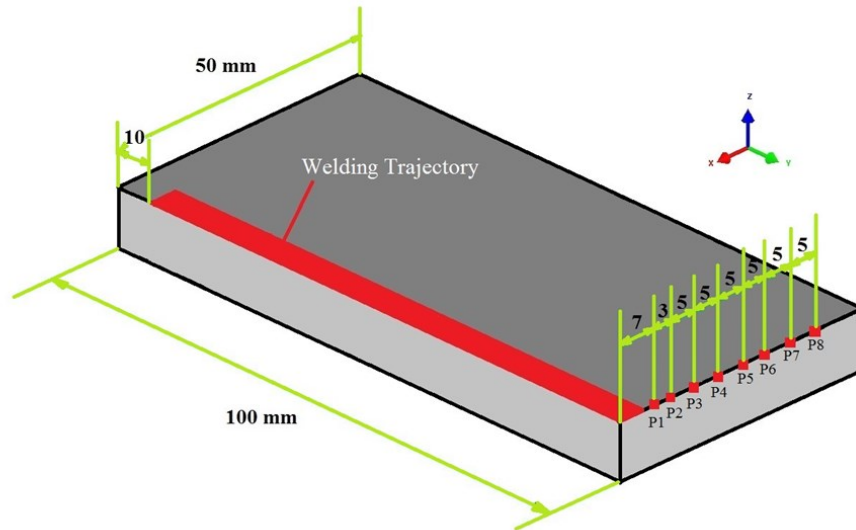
Schematic of a quarter of the welding plate and the position of the thermocouples which are all in one line
